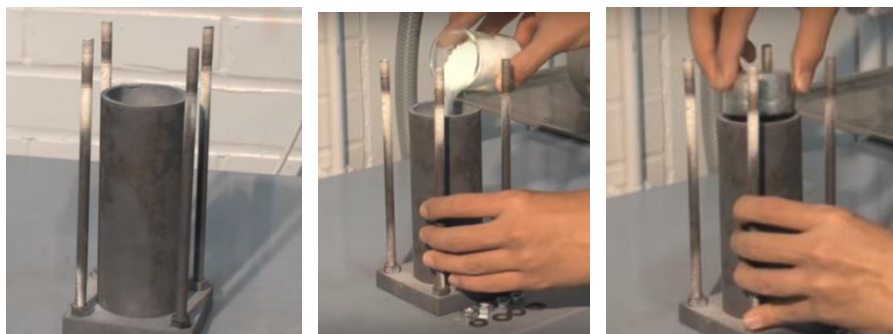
The mould, pouring the curing salt into the mould and inserting the aluminium tablet into the mould [15]
